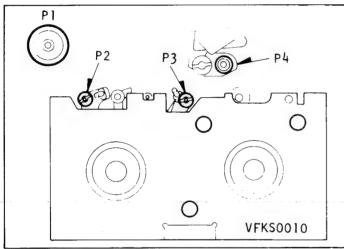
Height Adjustment of Tape Guide Posts - (1)
